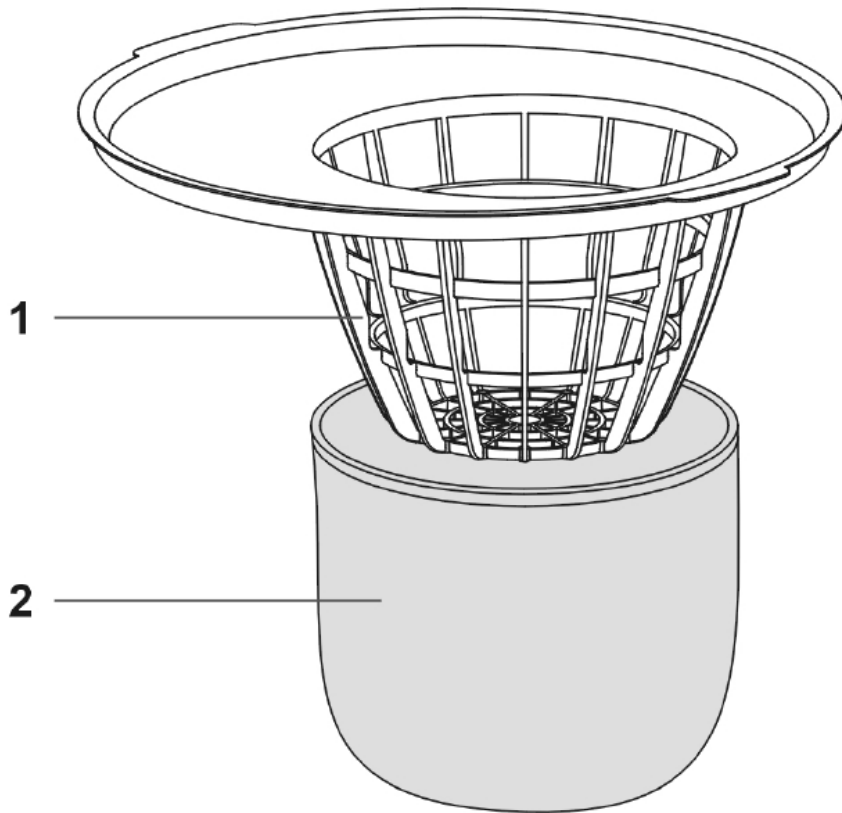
Spare parts drawing 2, main filter flexCAT 112 Q
